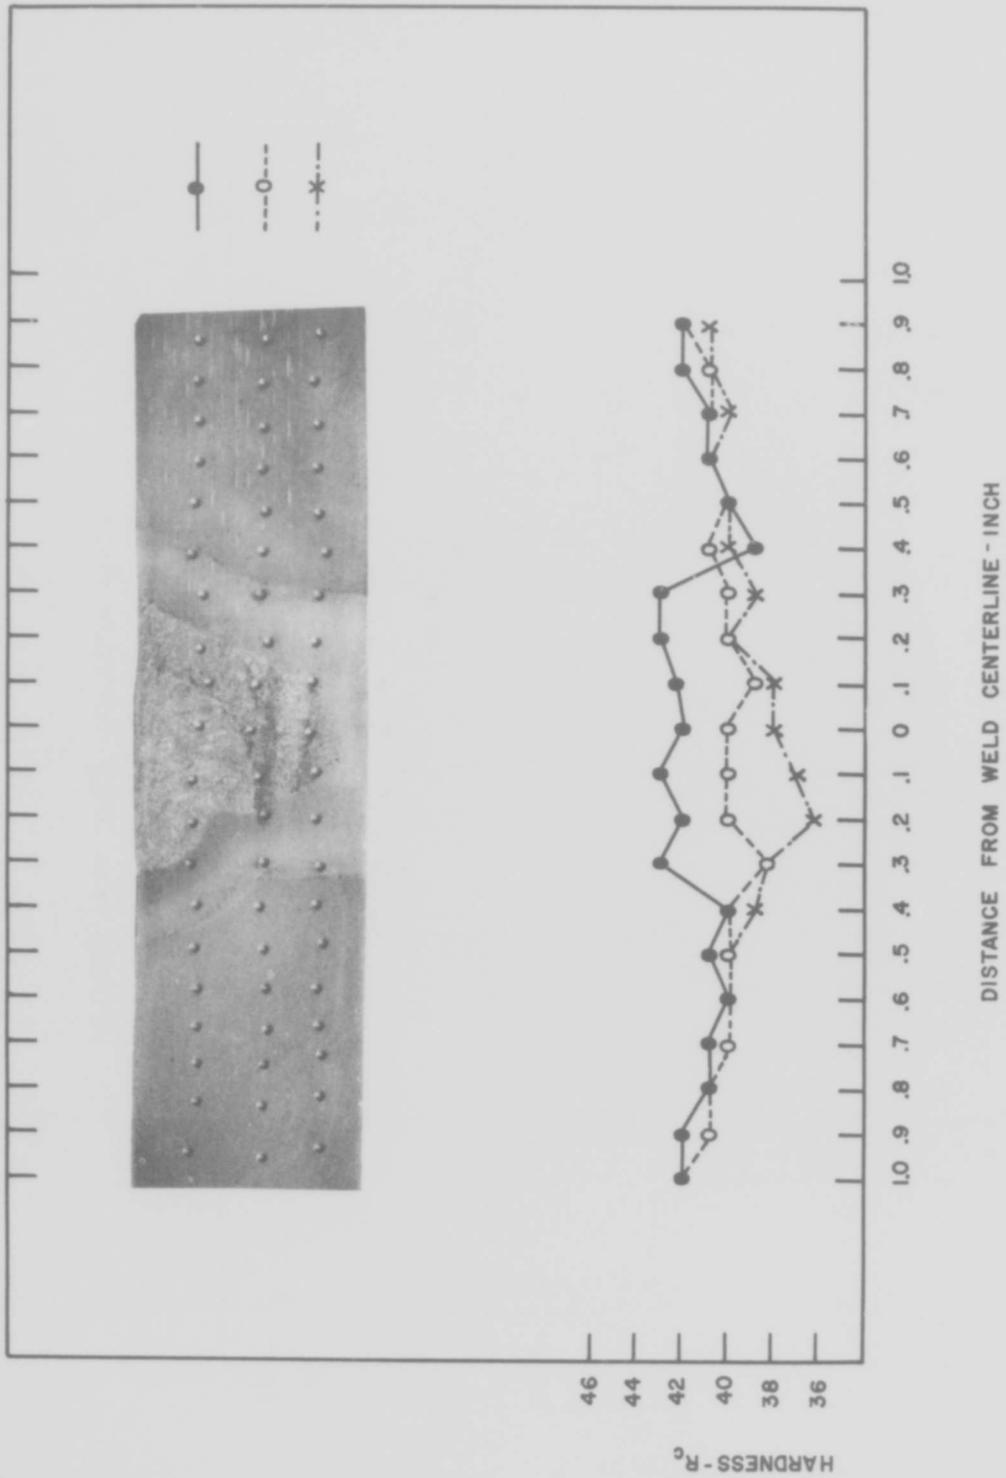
Hardness Survey of Multipass TIG Weld No. 0243 Made at 4 ipm in HP 9-4-45 Plate Using a 575°F Pre- and Post-Heat.
